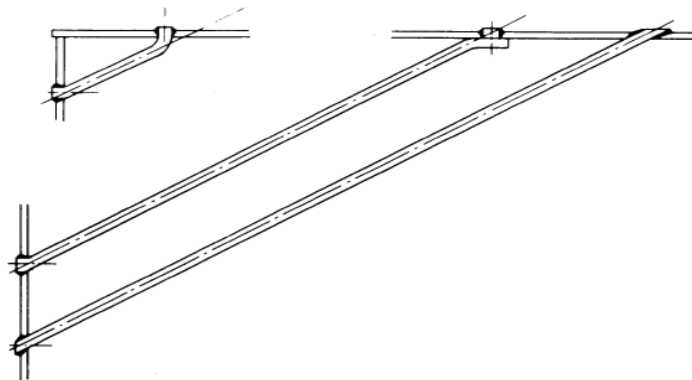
(b) UNACCEPTABLE TYPES OF DIAGONAL BRACES FOR INSTALLATION BY WELDING
